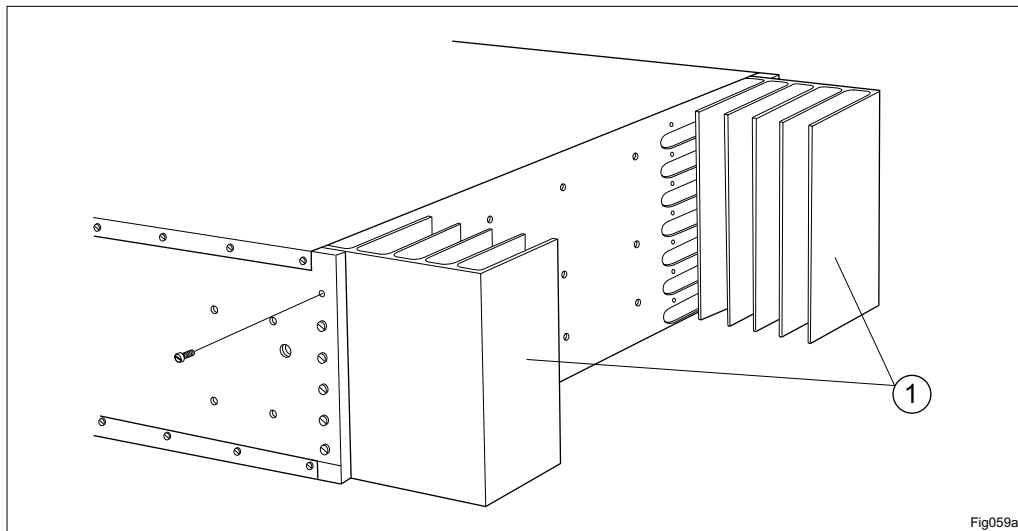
Fitting the cooling flanges on a 2U-1 magazine.
